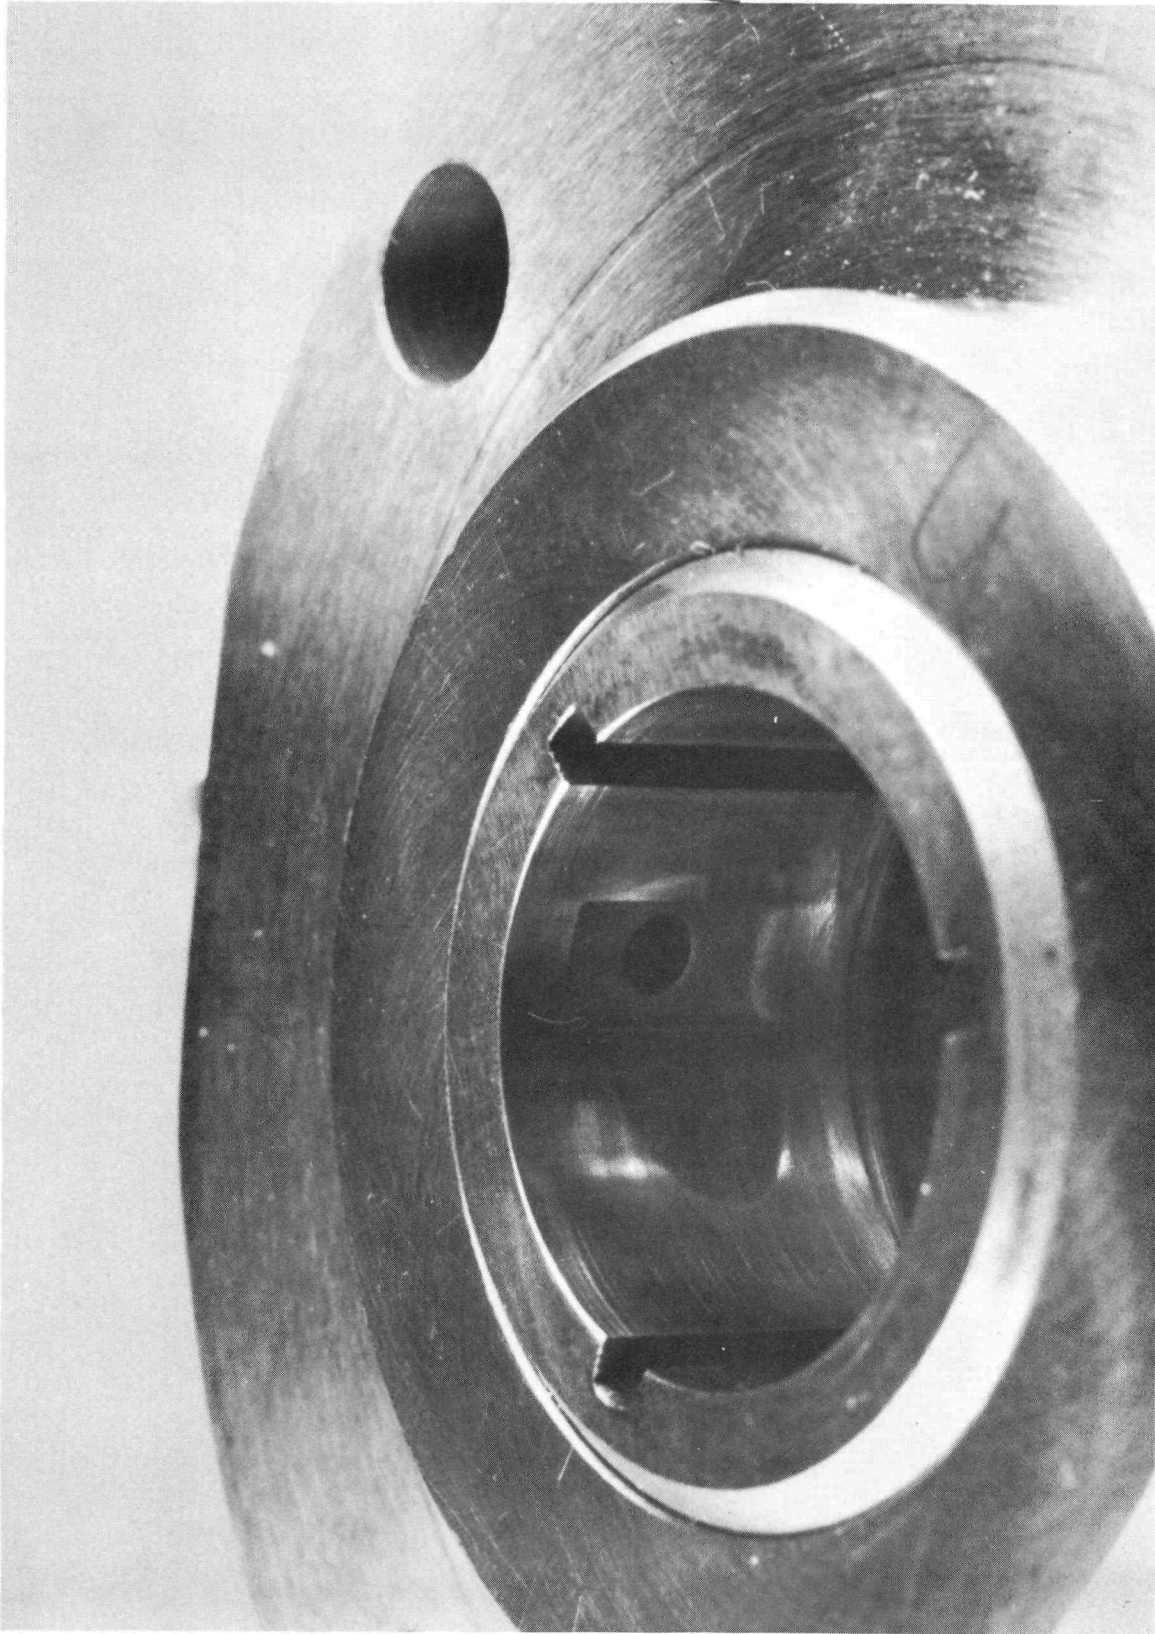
Three-Sector Bearing With Recessed Supply Pad
